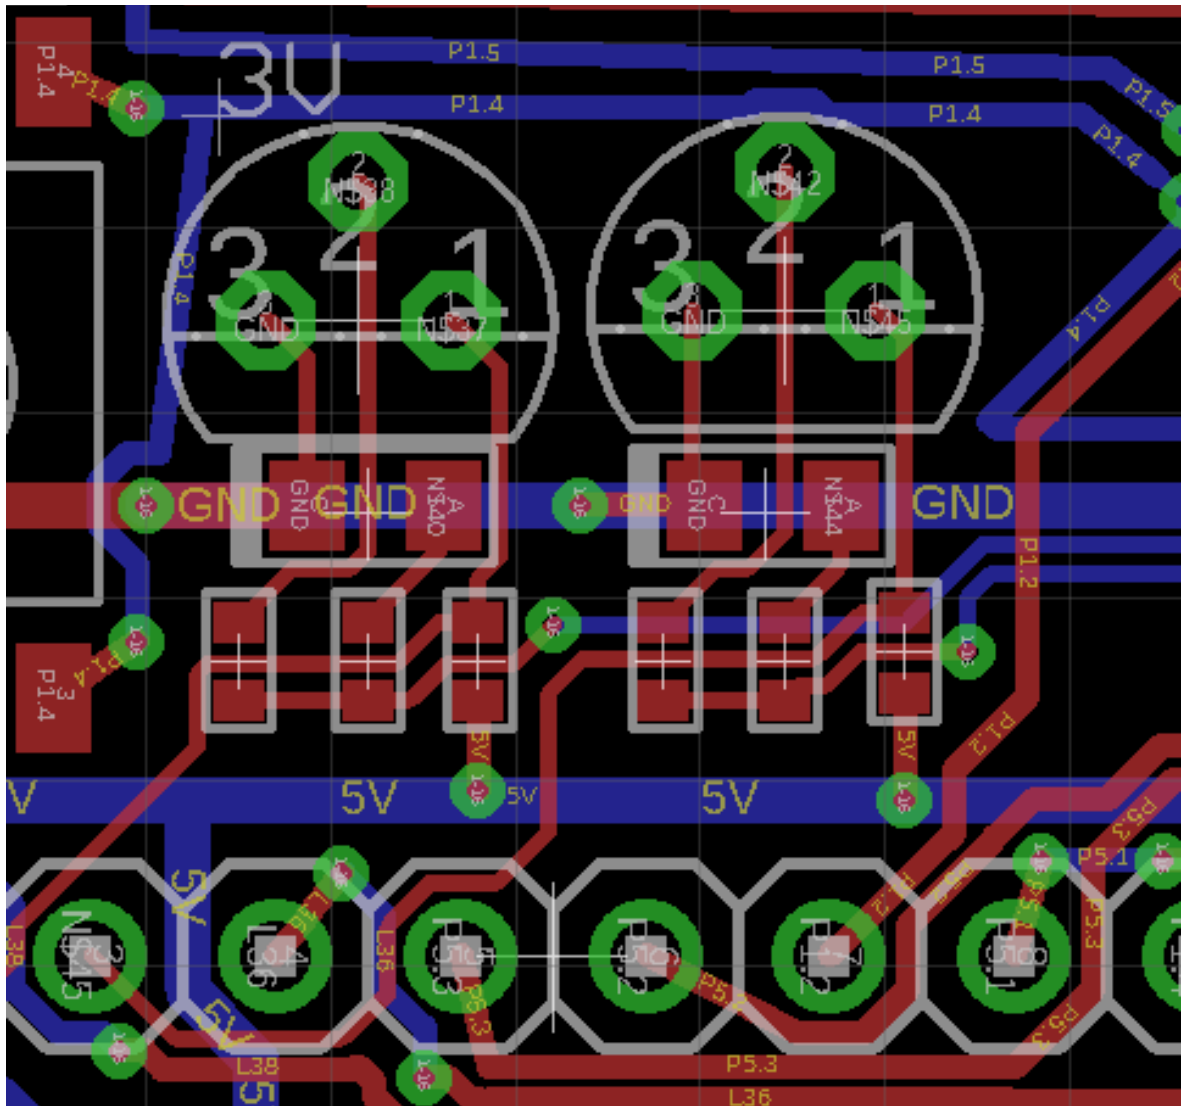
Motor Controller Step-Up Circuits Board Layout.
